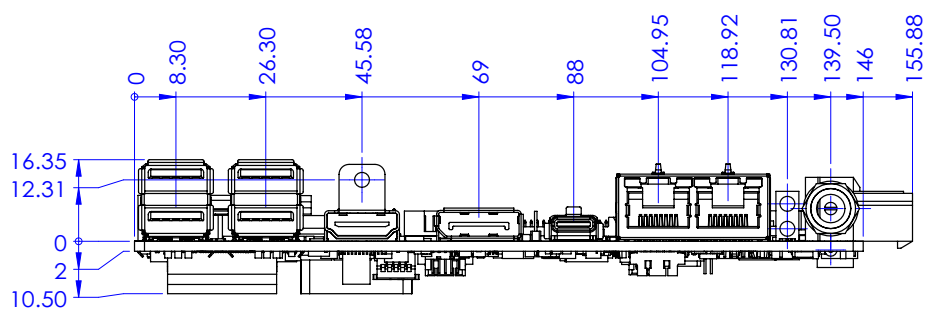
MIO-5375 Mechanical Drawing (Coastline)
